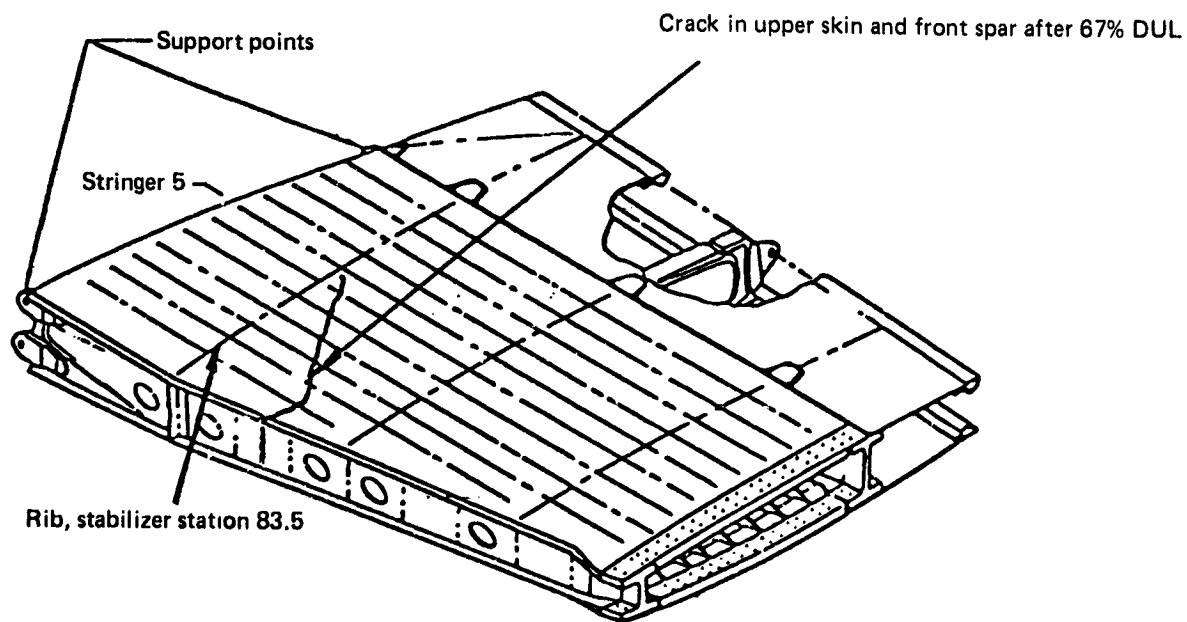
Stub Box Damage Tolerance Test—Upper Surface Crack
